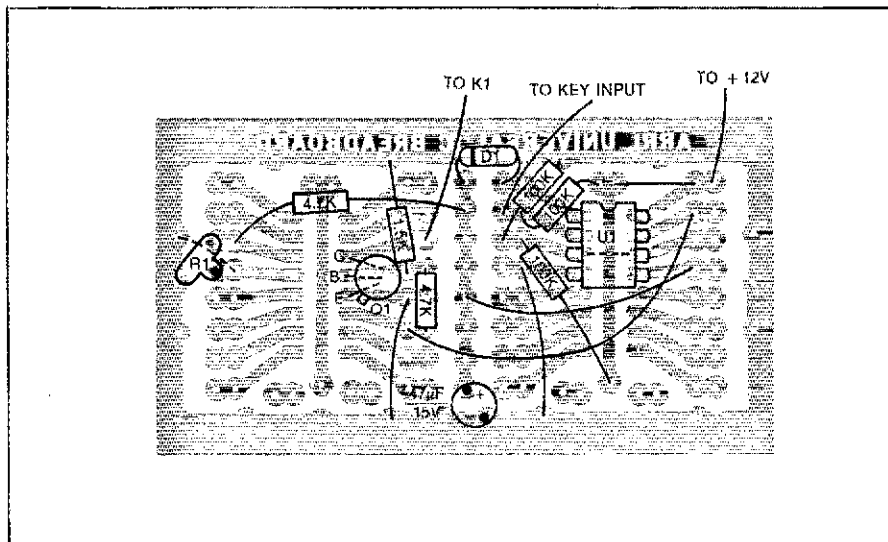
Parts-placement guide for the IMUS Control. Parts are mounted on the nonfoil side; the shaded area represents an X-ray view of the copper pattern. Resistances are in ohms; k = 1000, M = 1,000,000. Unmarked lines indicate insulated wire jumps. Broken lines indicate jumpers on foil side of board. The etching pattern of this board appears on page 42 of May 1980 QST.
